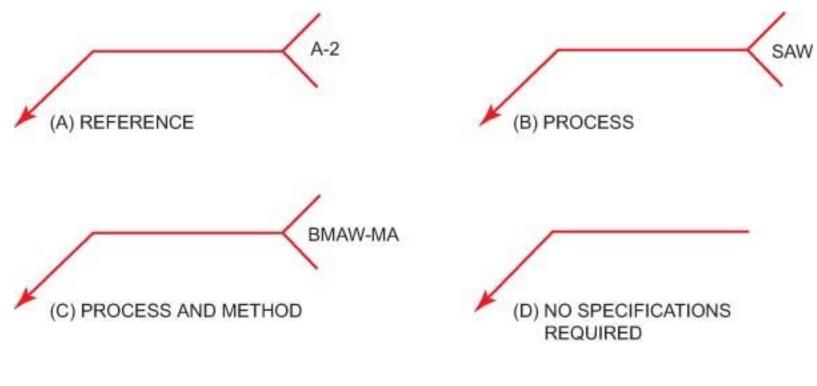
Locations of specifications, processes, and other references on weld symbols.
